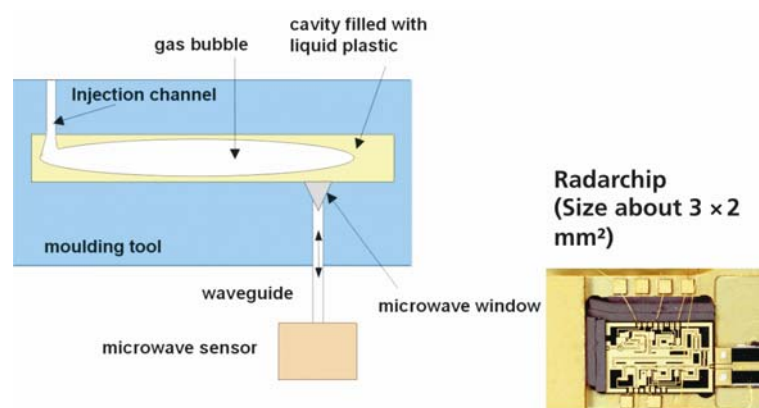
Injection moulding of hollow parts using the 94GHz FMCW module
